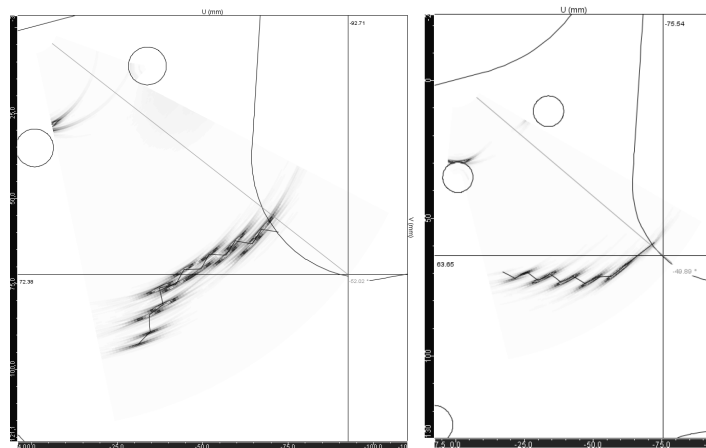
Sectorial scan obtained with CIVA for 2 types of crack started from the upper radius
